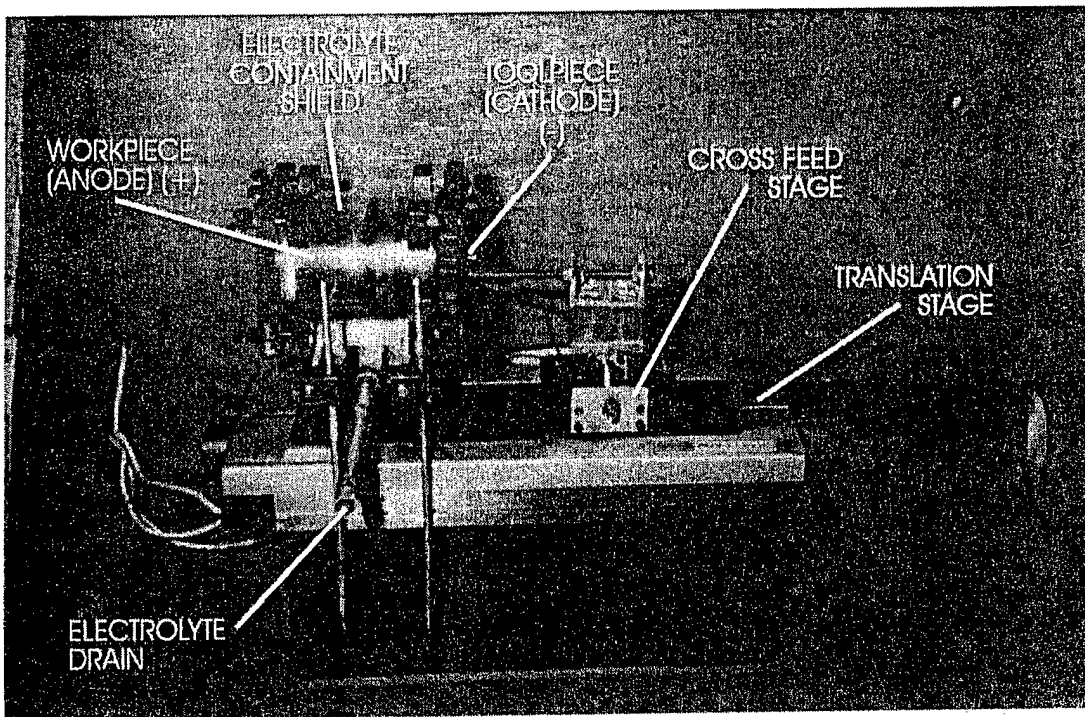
Photograph of prototype ECM lathe fabricated at Eltron incorporating a stepper motor driven translational stage.
